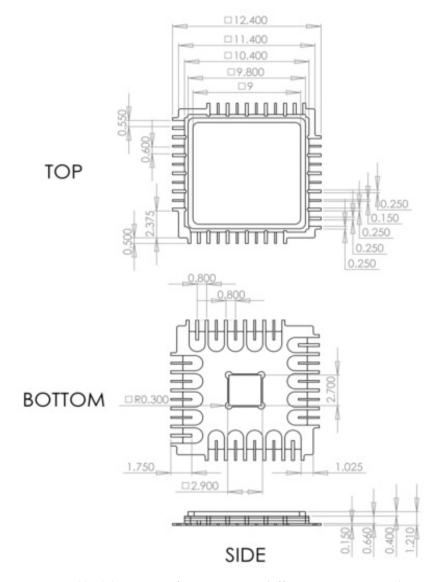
CQFP44 Package Drawing (All Dimensions in mm)
